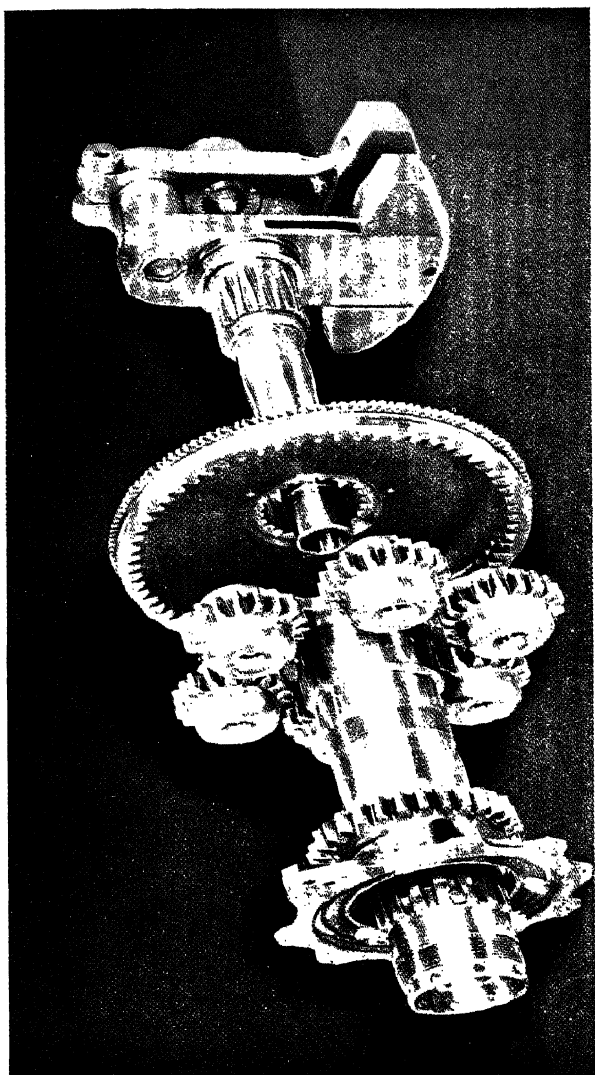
The Wright "Cyclone" G.100 crankshaft and reduction gear for airscrew drive.
